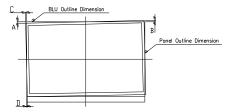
TFT-LCD Module Outline Dimensions (Rear view)
